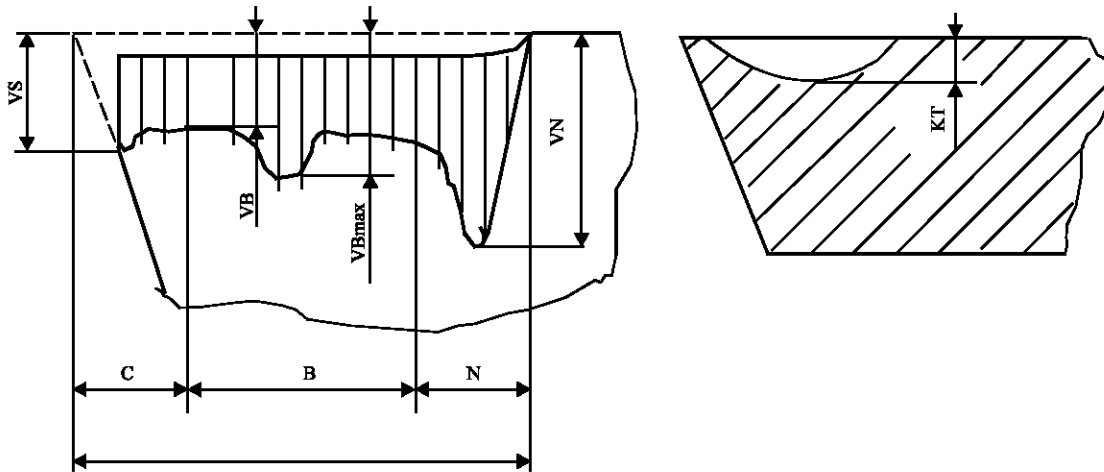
Schematic representation of tool wear criteria (a) flank wear (b) crater wear
